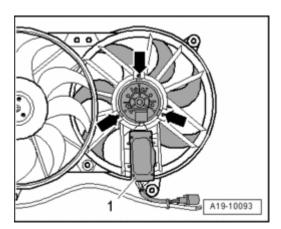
Removing Bolts, Unclipping Coolant Fan Control (FC) Control Module 2 J671 And Removing Coolant Fan And Coolant Fan Control Module
